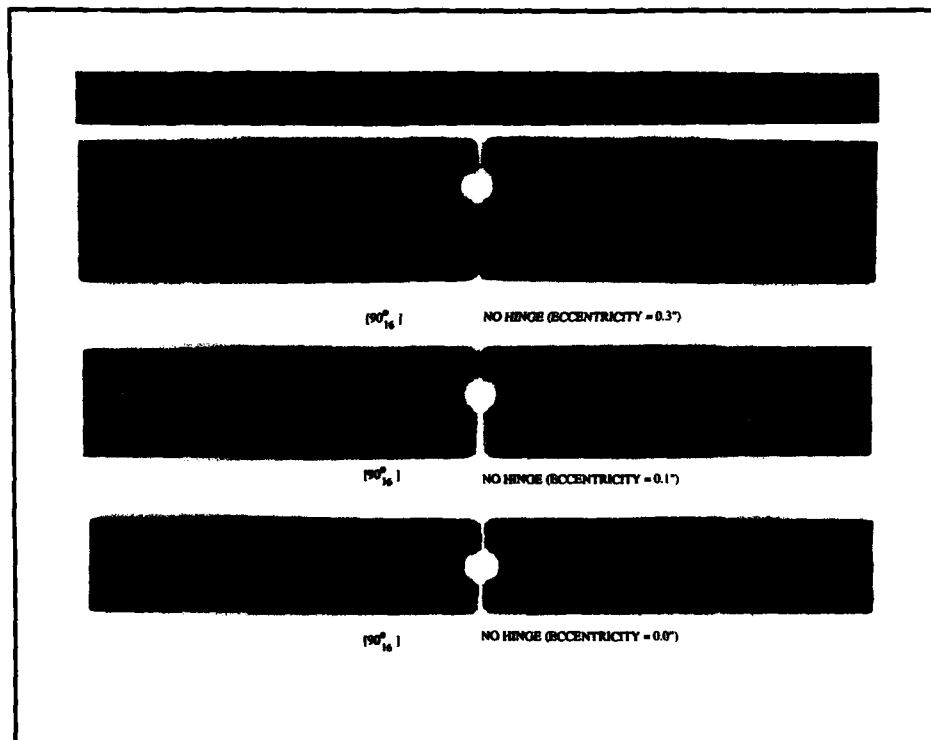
Failed $[90^{\circ}_{16}]$ Specimens (no mounting fixture)
